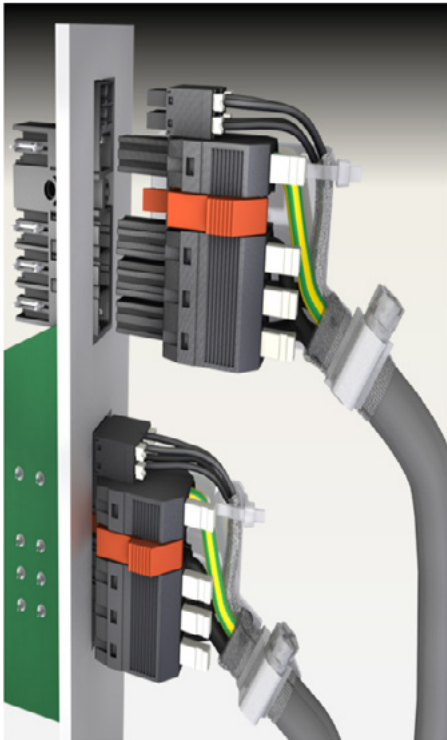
Robust mechanical connection and simple operation thanks to central flange
